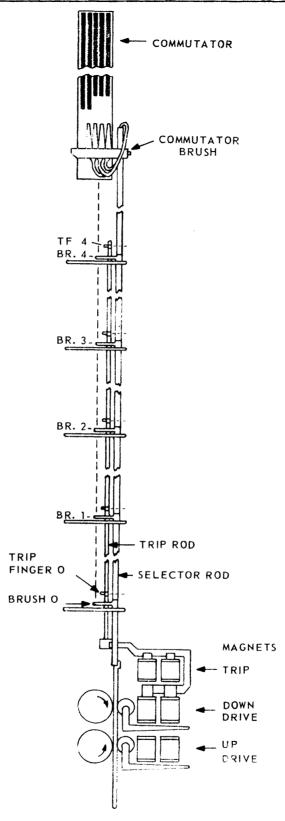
Selector Rod, Drive Mechanism, and Clutch Assembly
